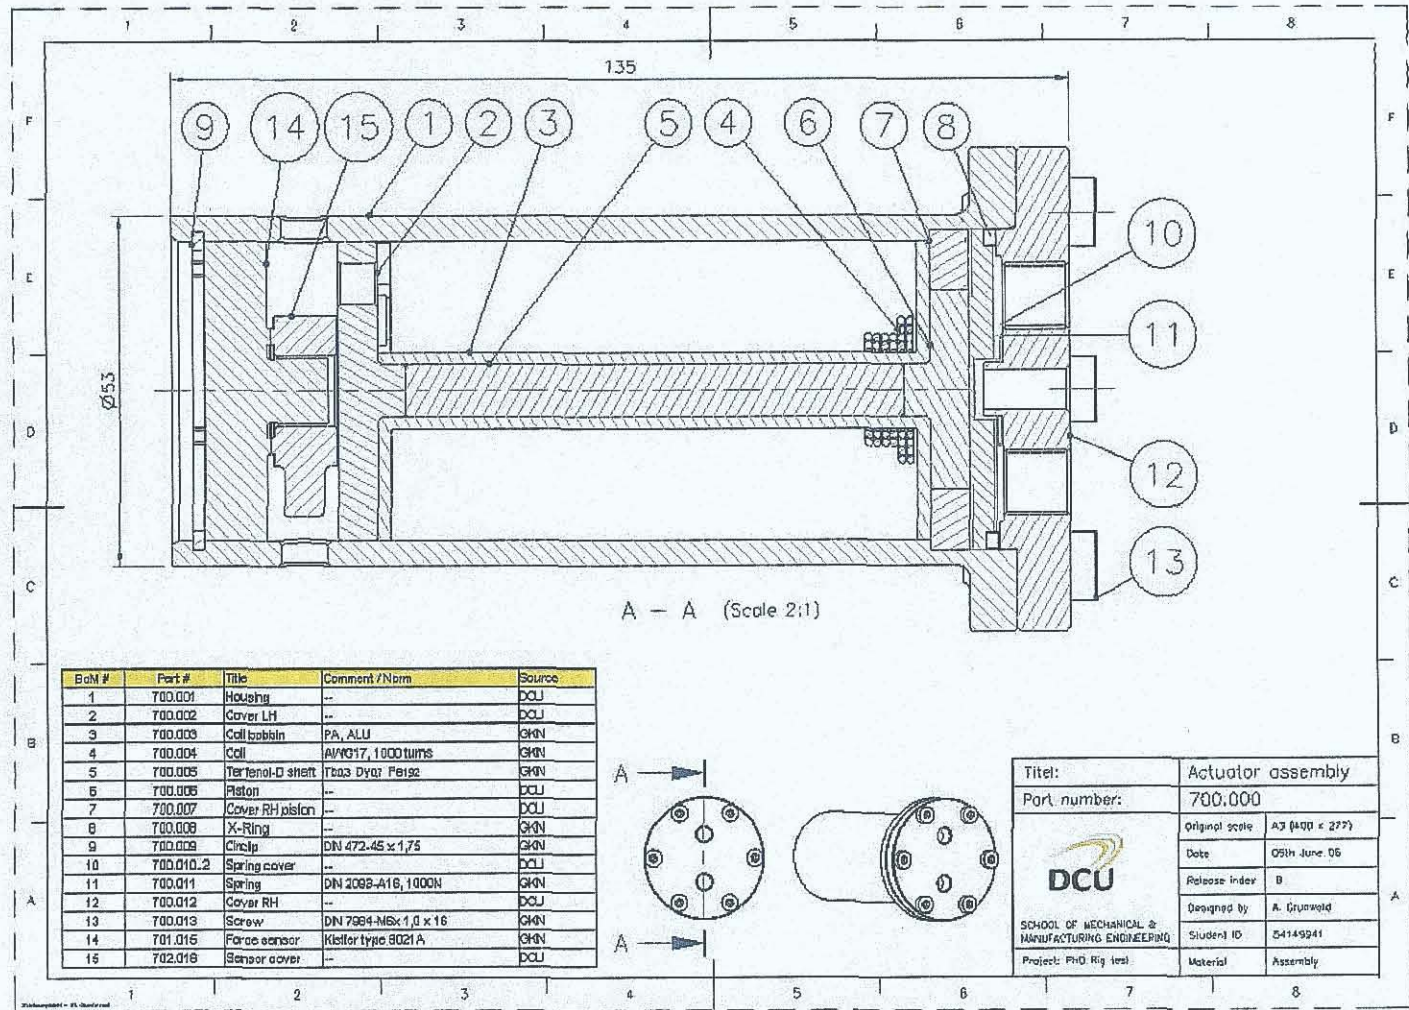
Actuator assembly 700.000 with membrane and small piston
